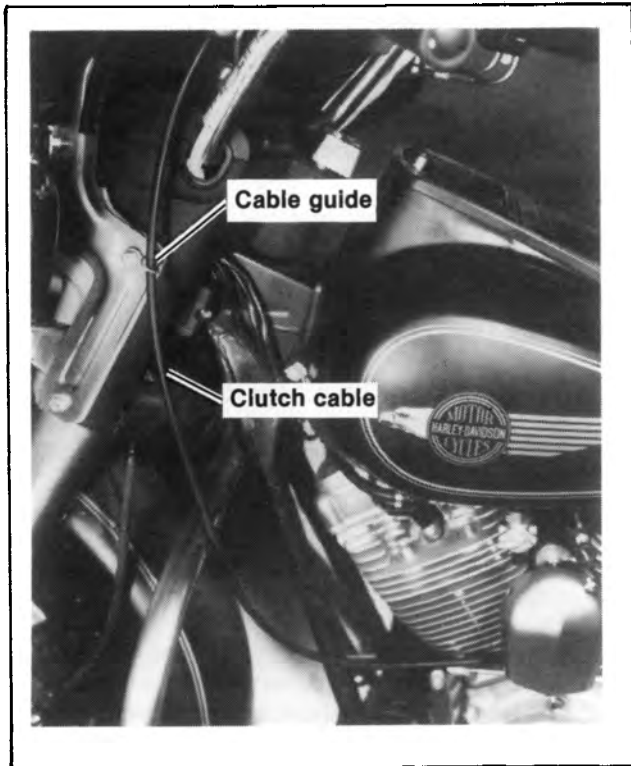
Clutch Cable Routing — 1984 FLHT
